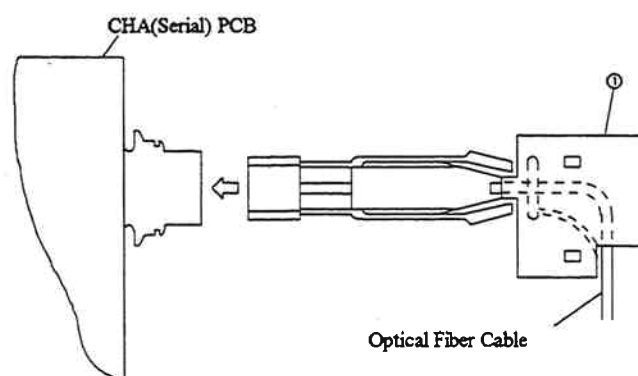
Connection of Optical Fiber Cable
